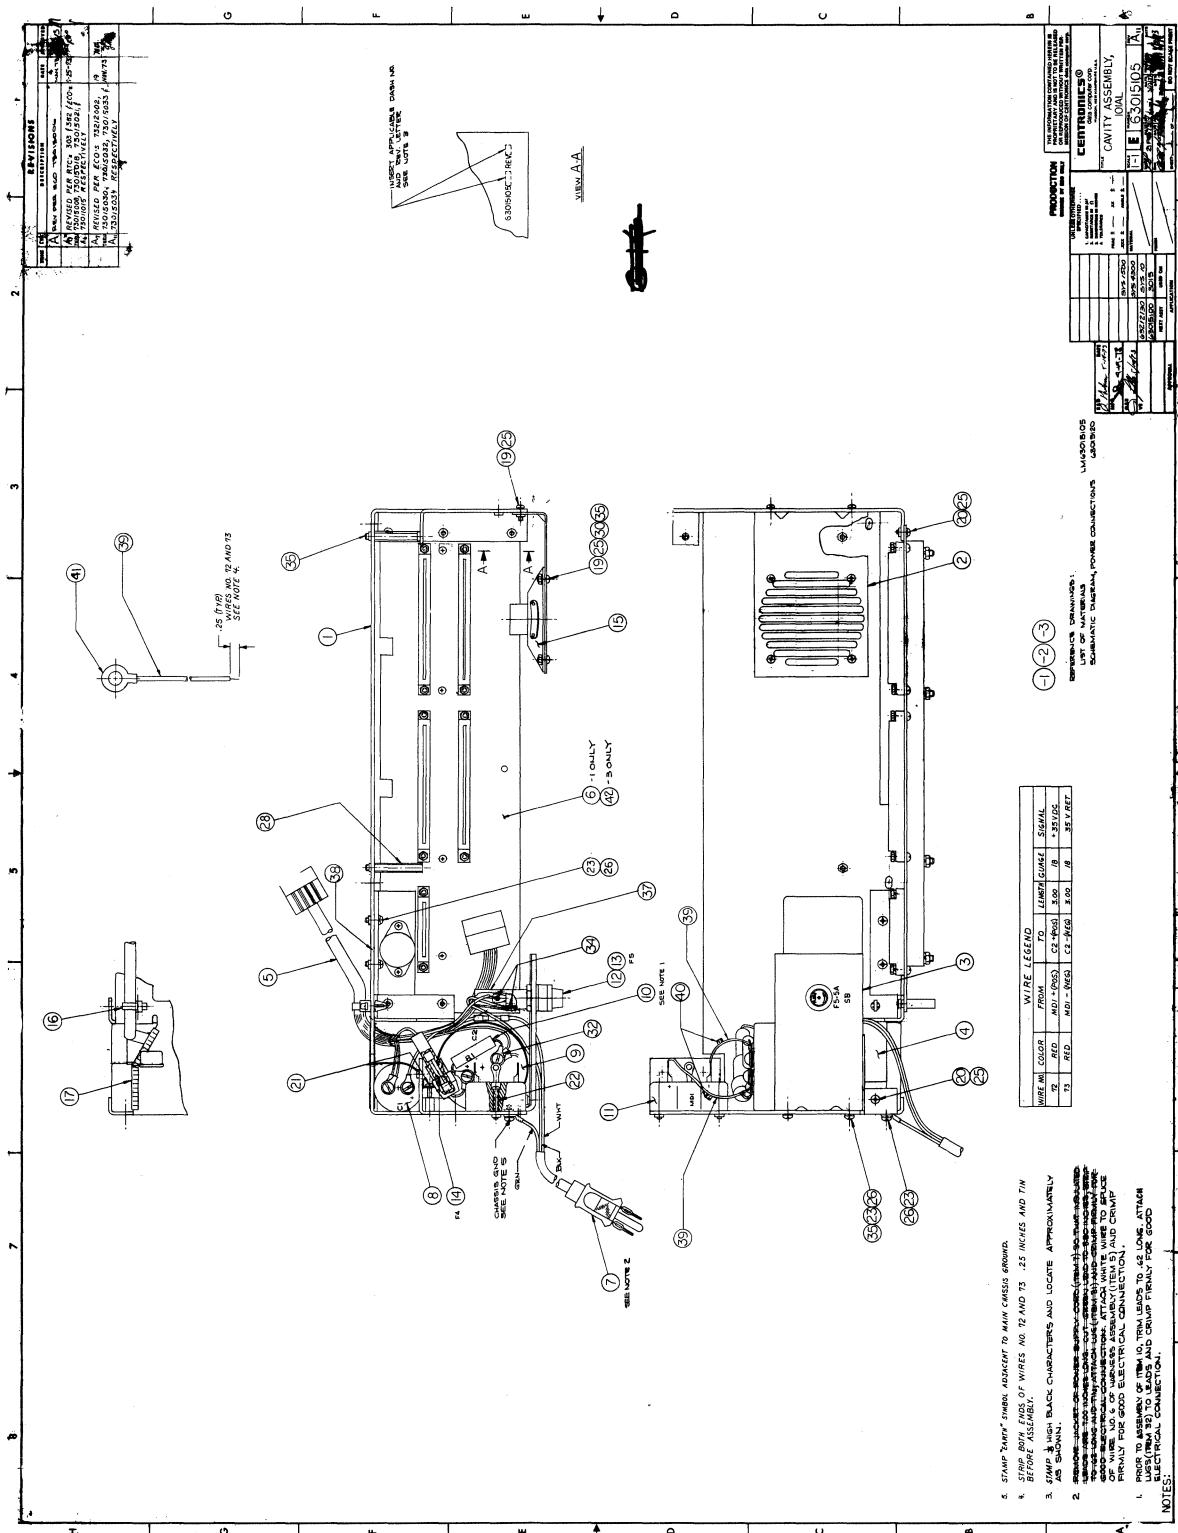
ELECTRONICS CAVITY ASSEMBLY
